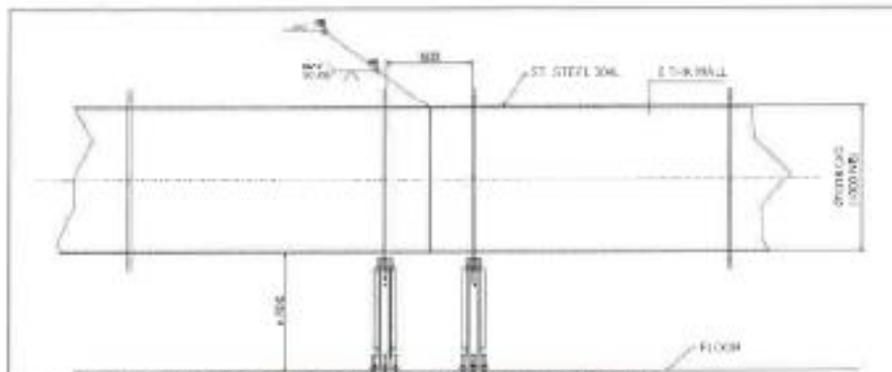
Typical welding arrangement for a 1000 NB pipe site weld
